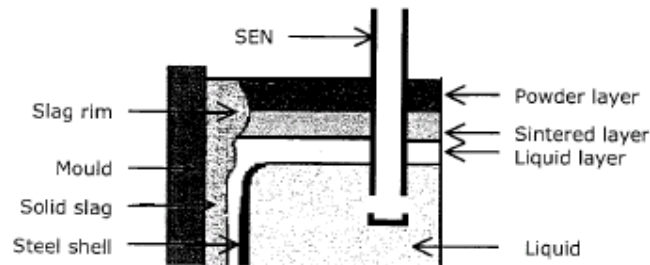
Continuous casting mould flux layers in copper mould (Mills *et al.*, 2005)
